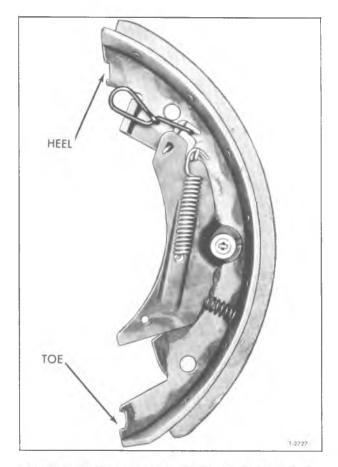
Brake Shoe and Automatic Adjuster Assembly
